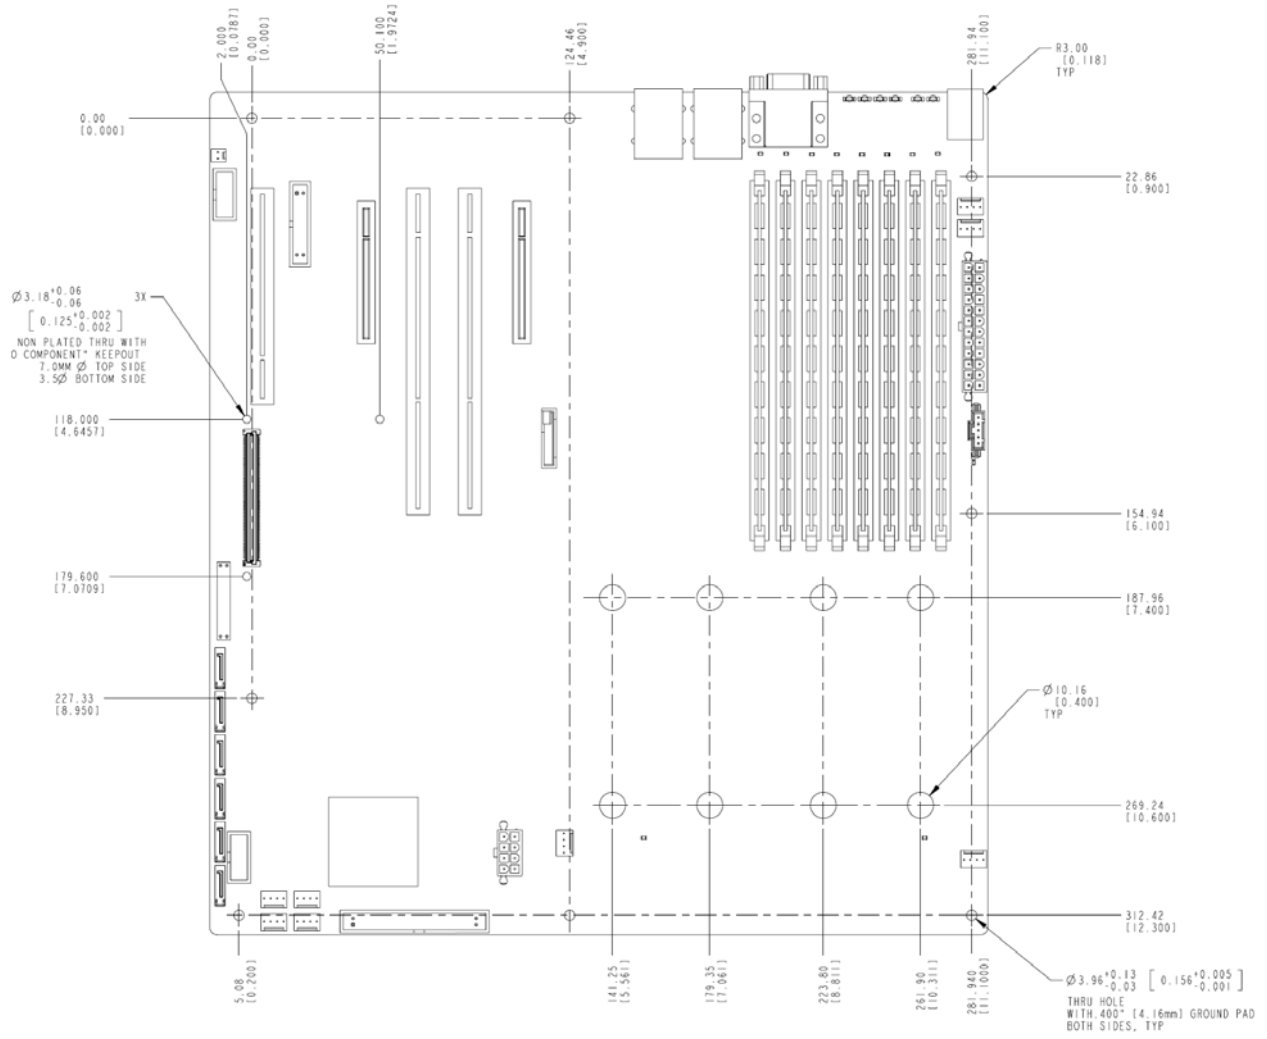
Intel® Server Board S5000VSA – Mounting Hole Locations
